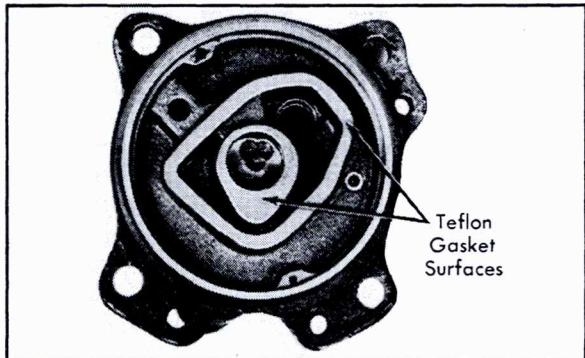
Teflon Gasket Surfaces on Rear Head
